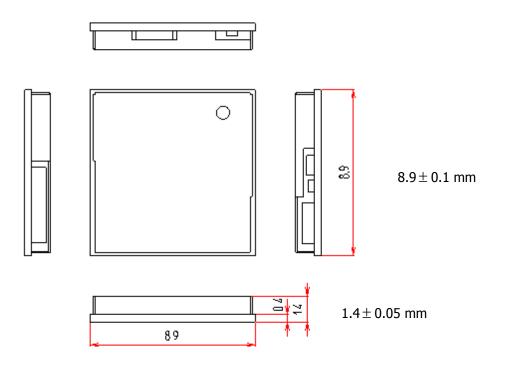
SWL-2480 Mechanical Dimension (unit: mm)
